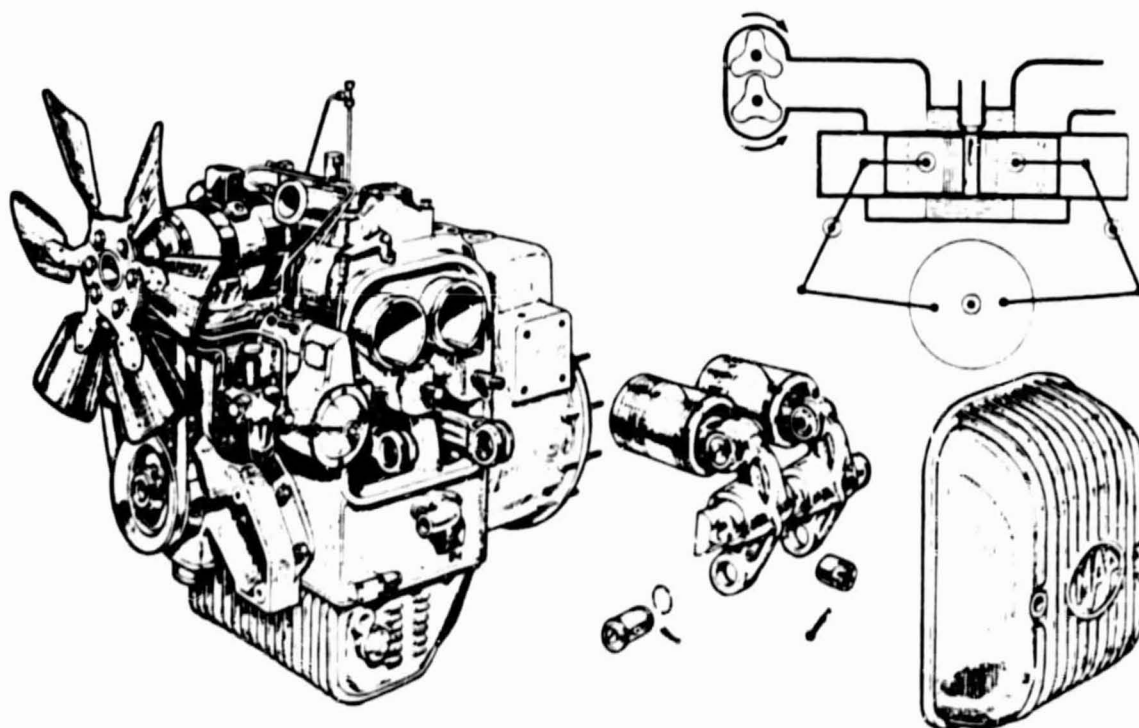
Turbocharged Single Crankshaft Two-Cylinder
